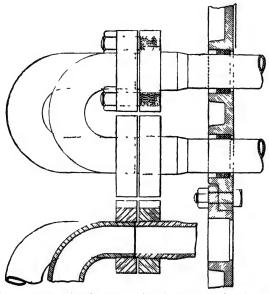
Showing return bend construction, Babcock and Wilcox economizer
